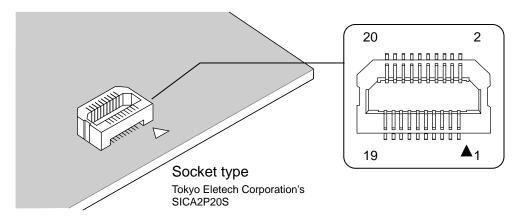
Target Board Connectors for DWire FL Connecting Cable (connector mounting side on the board)
